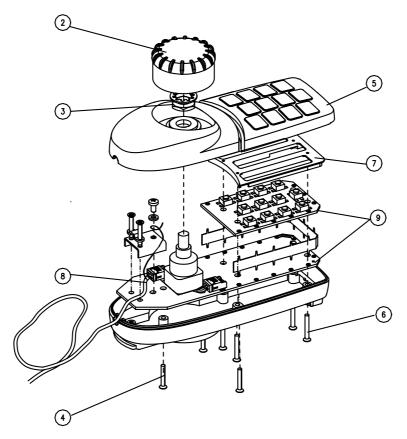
K-REMCO, K-CREMCO disassembly and reassembly
